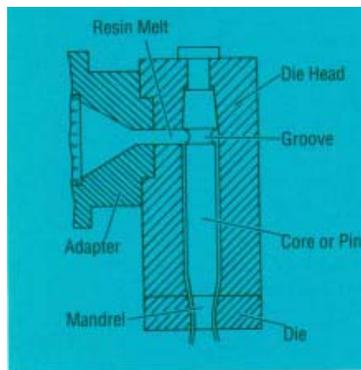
Schematic drawing of a side-fed die with a grooved core.
